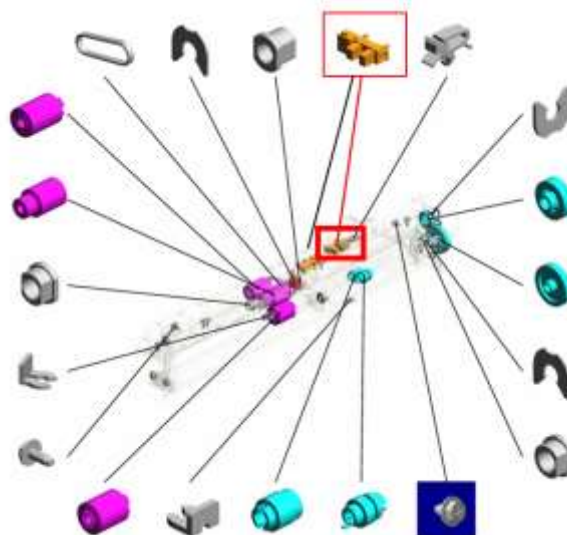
Position of the second U-shaped photoelectric sensor in the paper picking assembly [6]
